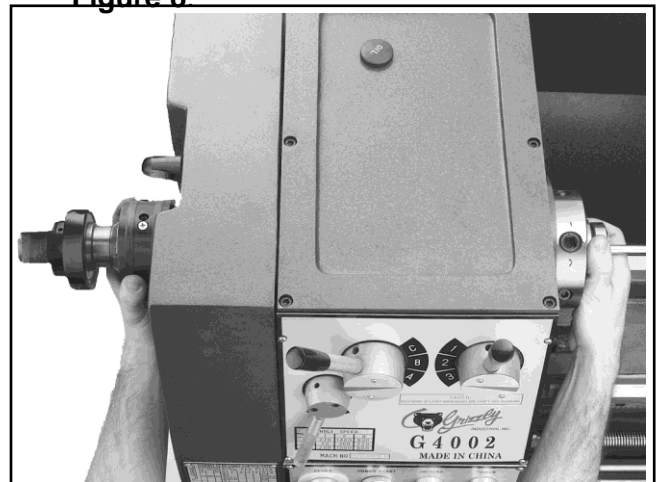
Rotating collet in spindle to engage with adjusting hub.
